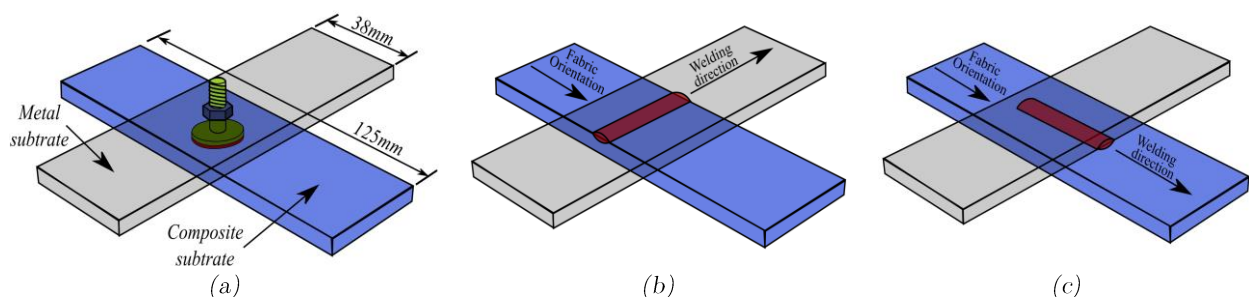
Cross-tension specimens: stud bonding (a), longitudinal laser welding (b) and transverse laser welding specimens (c).
